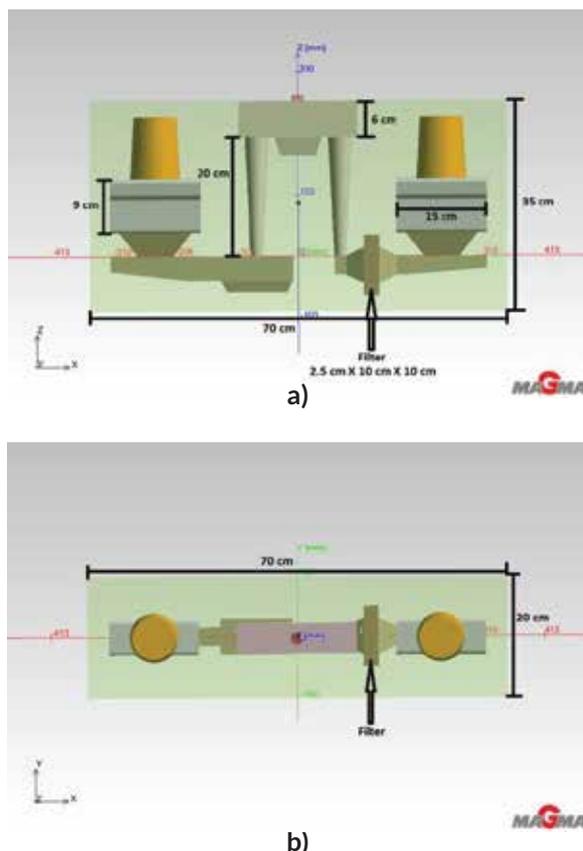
MAGMA 5.3 drawing of mold and rigging system: (a) front view and (b) top view
